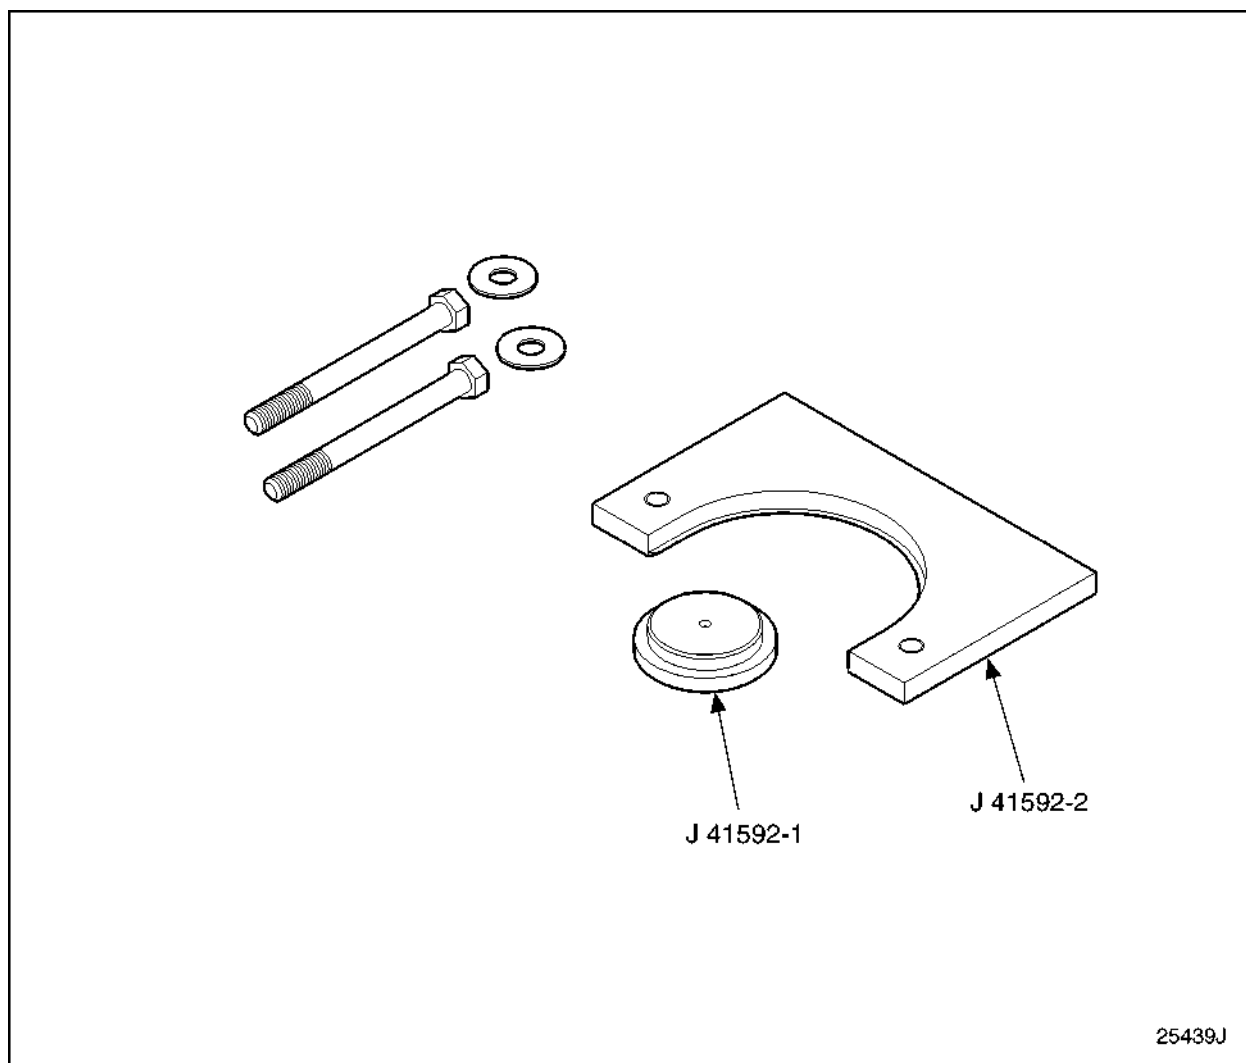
Rear Crank Wear Sleeve Remover,J 41592
